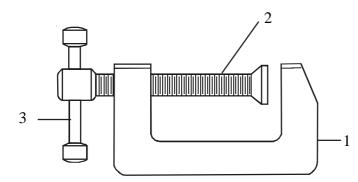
'C' clamp 1. Frame 2. Screw 3. Handle
